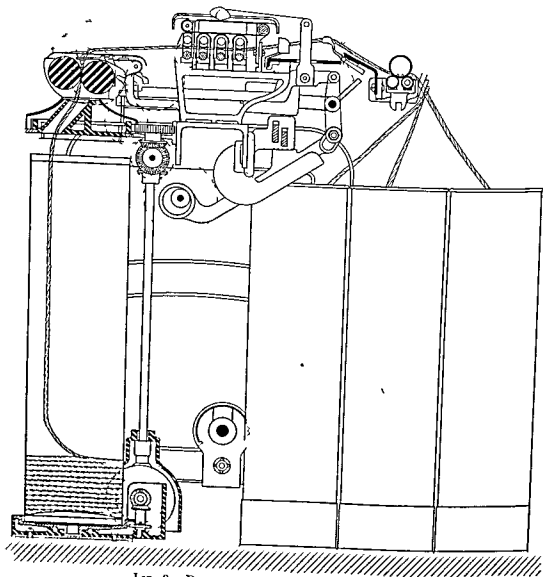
DRAWING PUMP SECTIONAL ELEVATION
